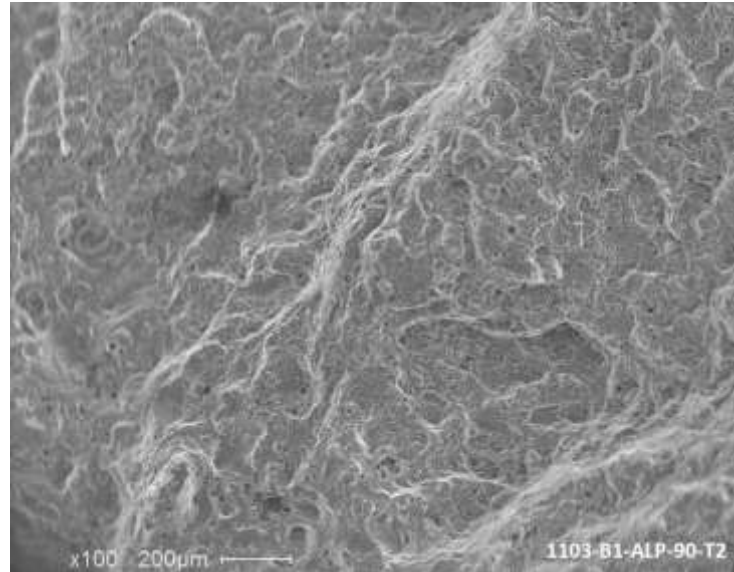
LAM processed tensile specimen with dominant ductile fracture surface features
